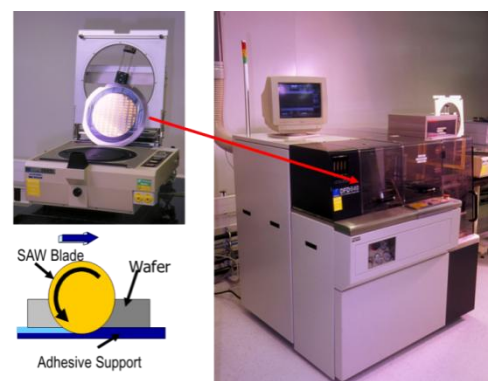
Die cutting or Dicing process (STMicroelectronics)
